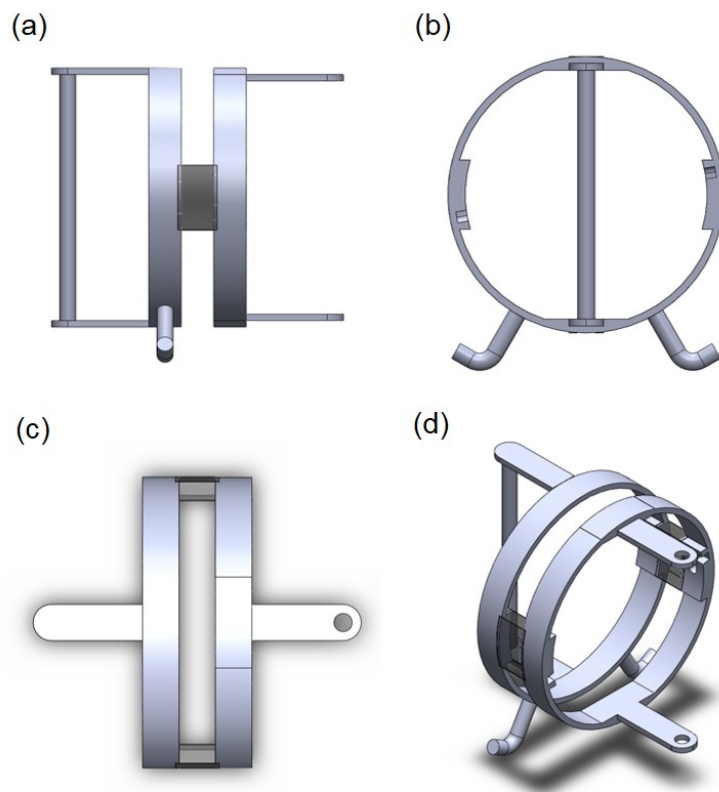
Solidworks model of a new Wormbot segment. (a) Side View (b) End View (c) Top View (d) Isometric View
